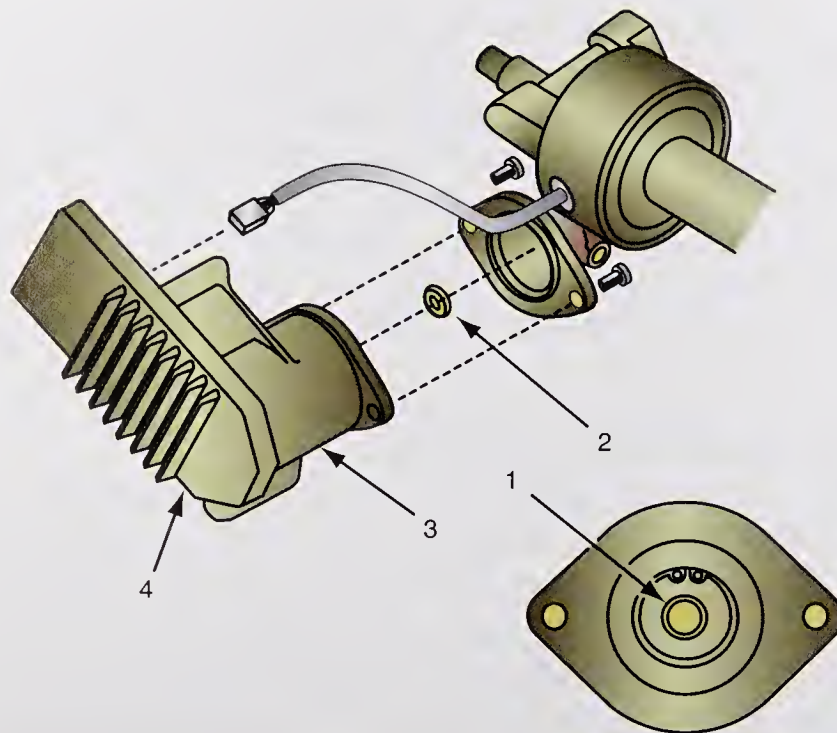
Removing and replacing the PSCM and motor assembly.
